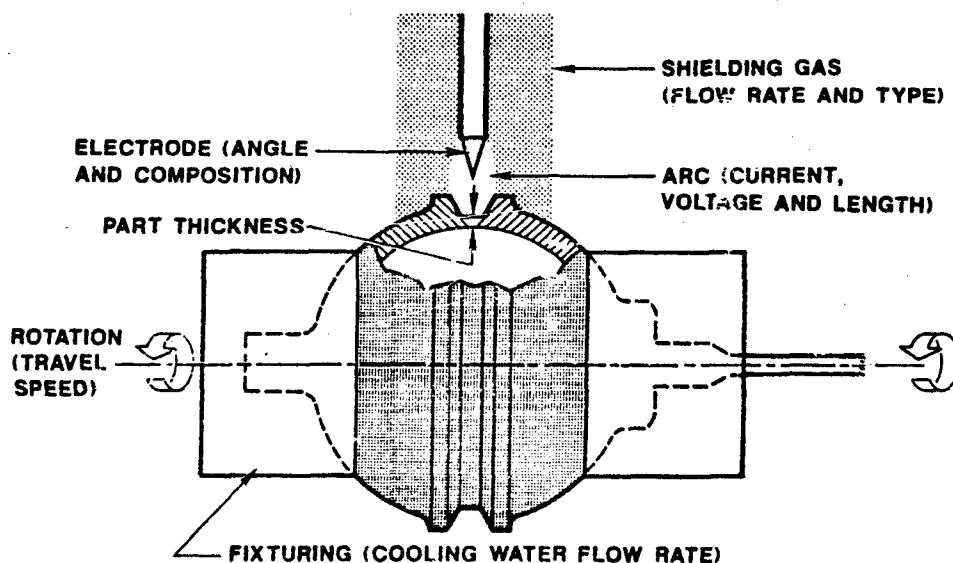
Gas Tungsten Arc (GTA) welding parameters
